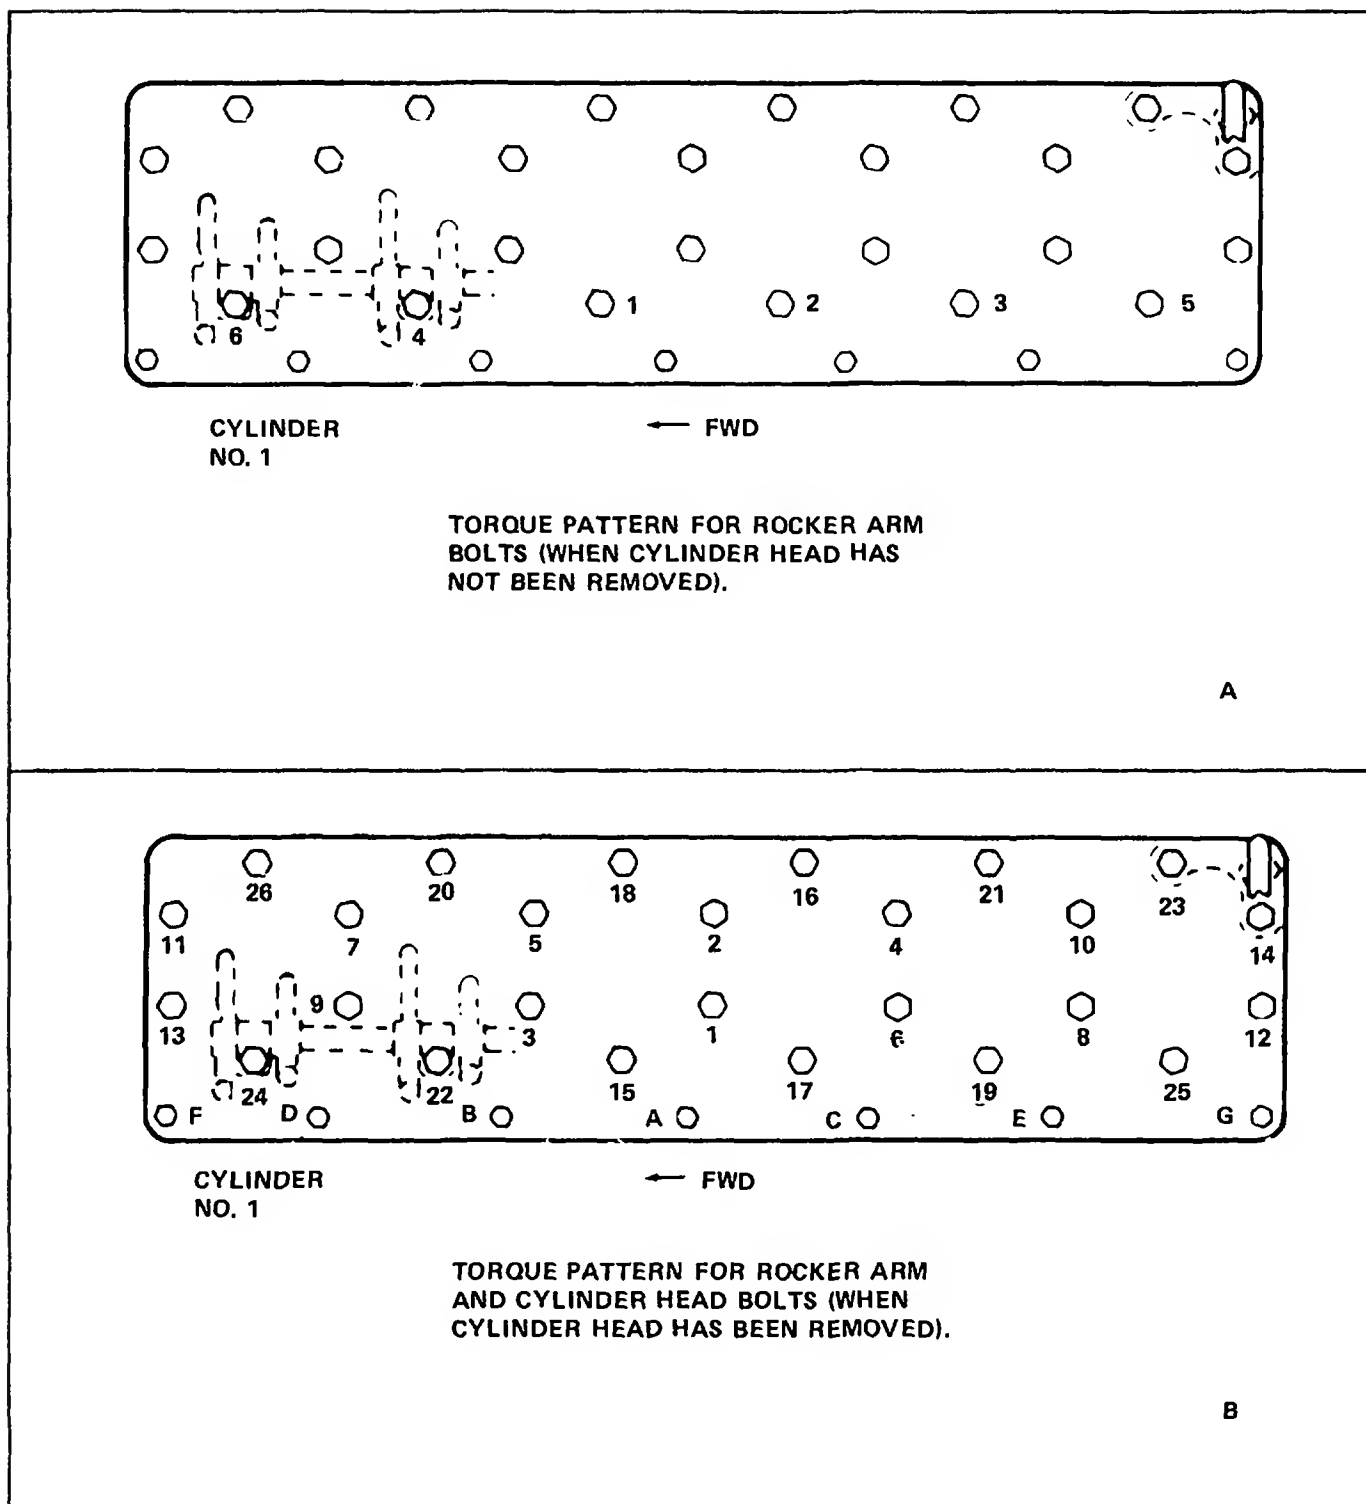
Rocker Arm and Cylinder Head Bolt Torque Patterns
